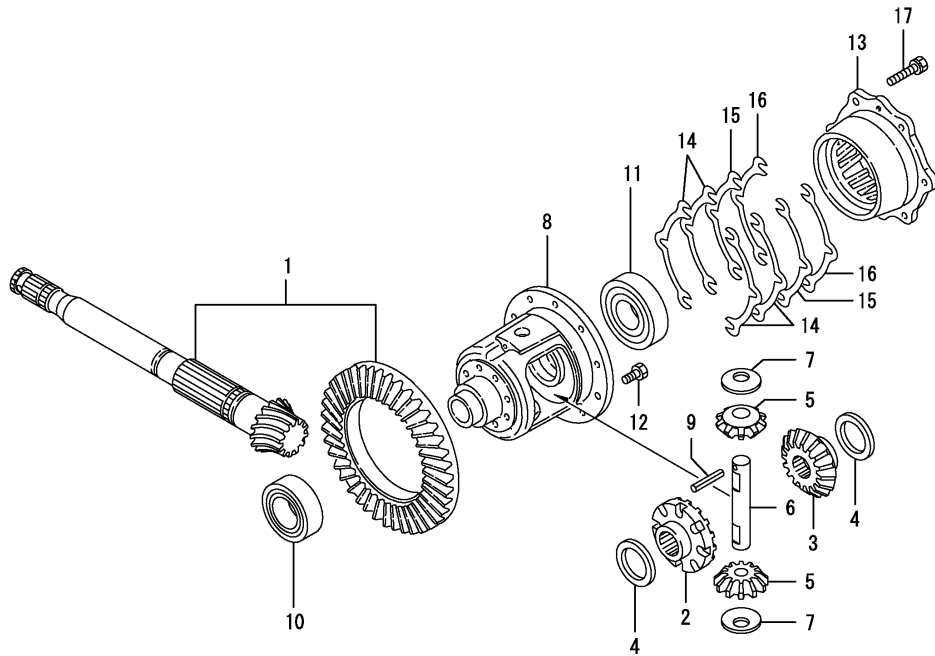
RING GEAR & DIFFERENTIAL GEAR
